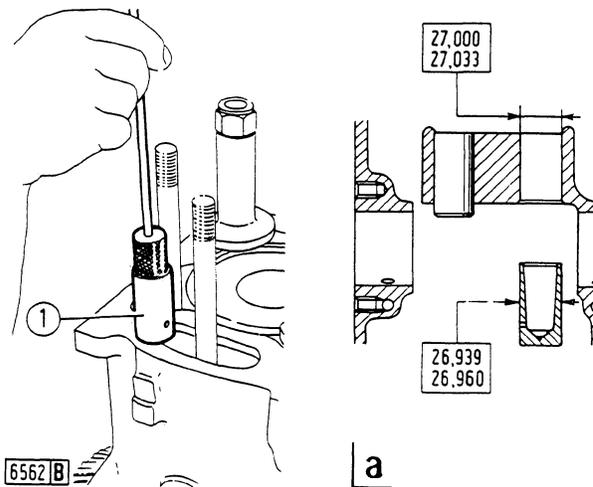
Removing (installing) lifters (1) with tool 75290947 and main dimensions of lifters and seats in the block (a).
